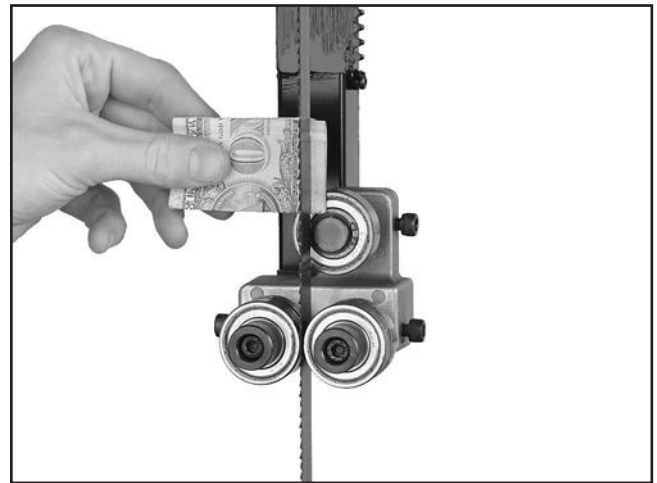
Illustration of blade set perpendicular (90°) to the support bearing face.
